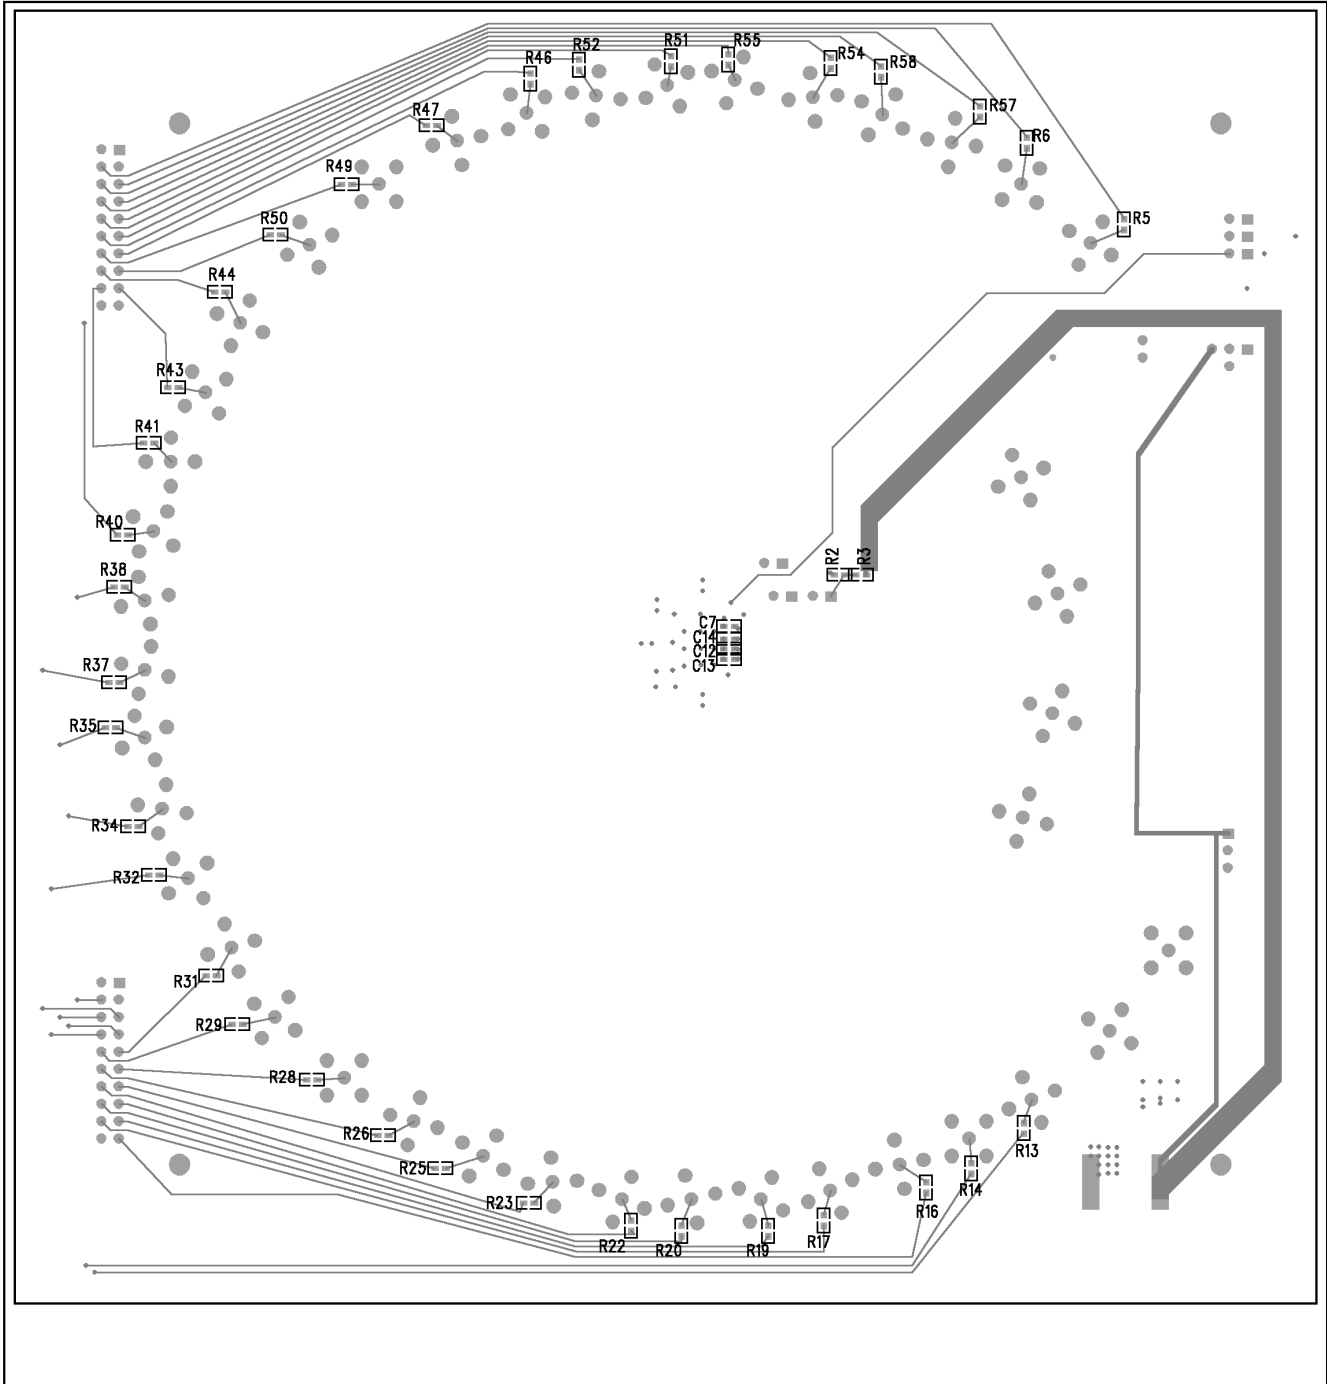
MAX3880 EV Kit Component Placement Guide—Solder Side
